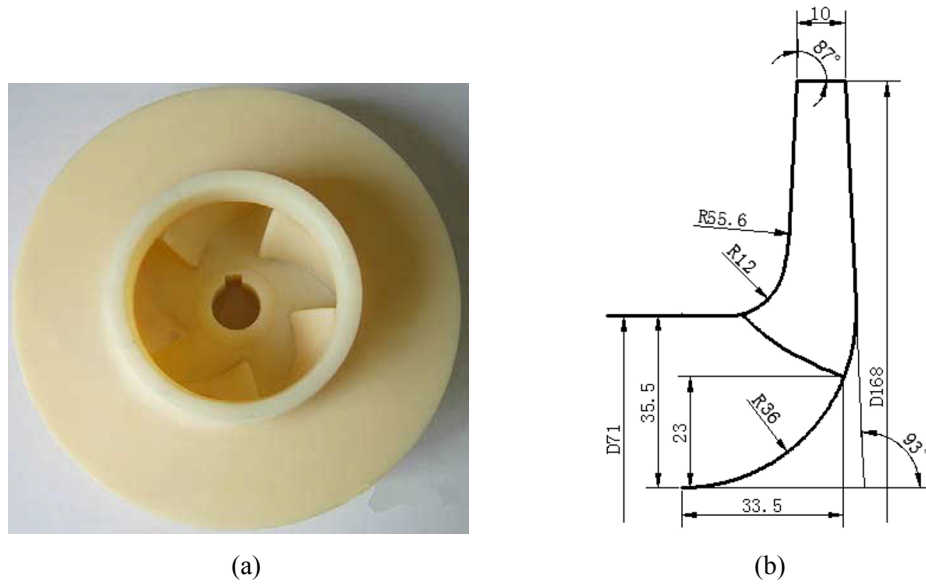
Test impeller model (a) and impeller meridional shape (b).
